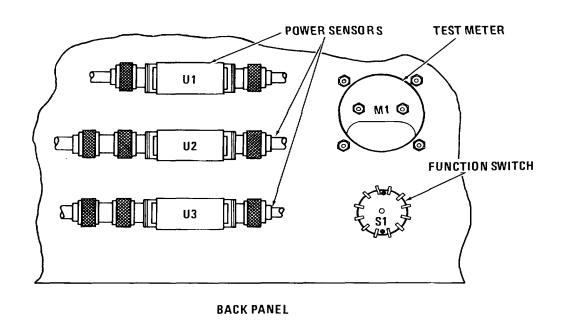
Electrical Equipment Rack Disassembly (Sheet 2 of 3)
